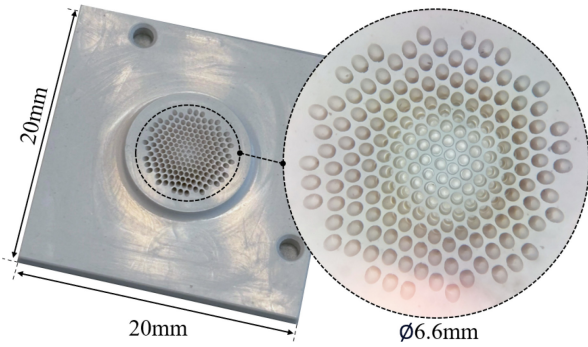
Fabricated prototype of the flat lens. The inset shows in more detail the drilled holes in the hexagonal grid layout.
